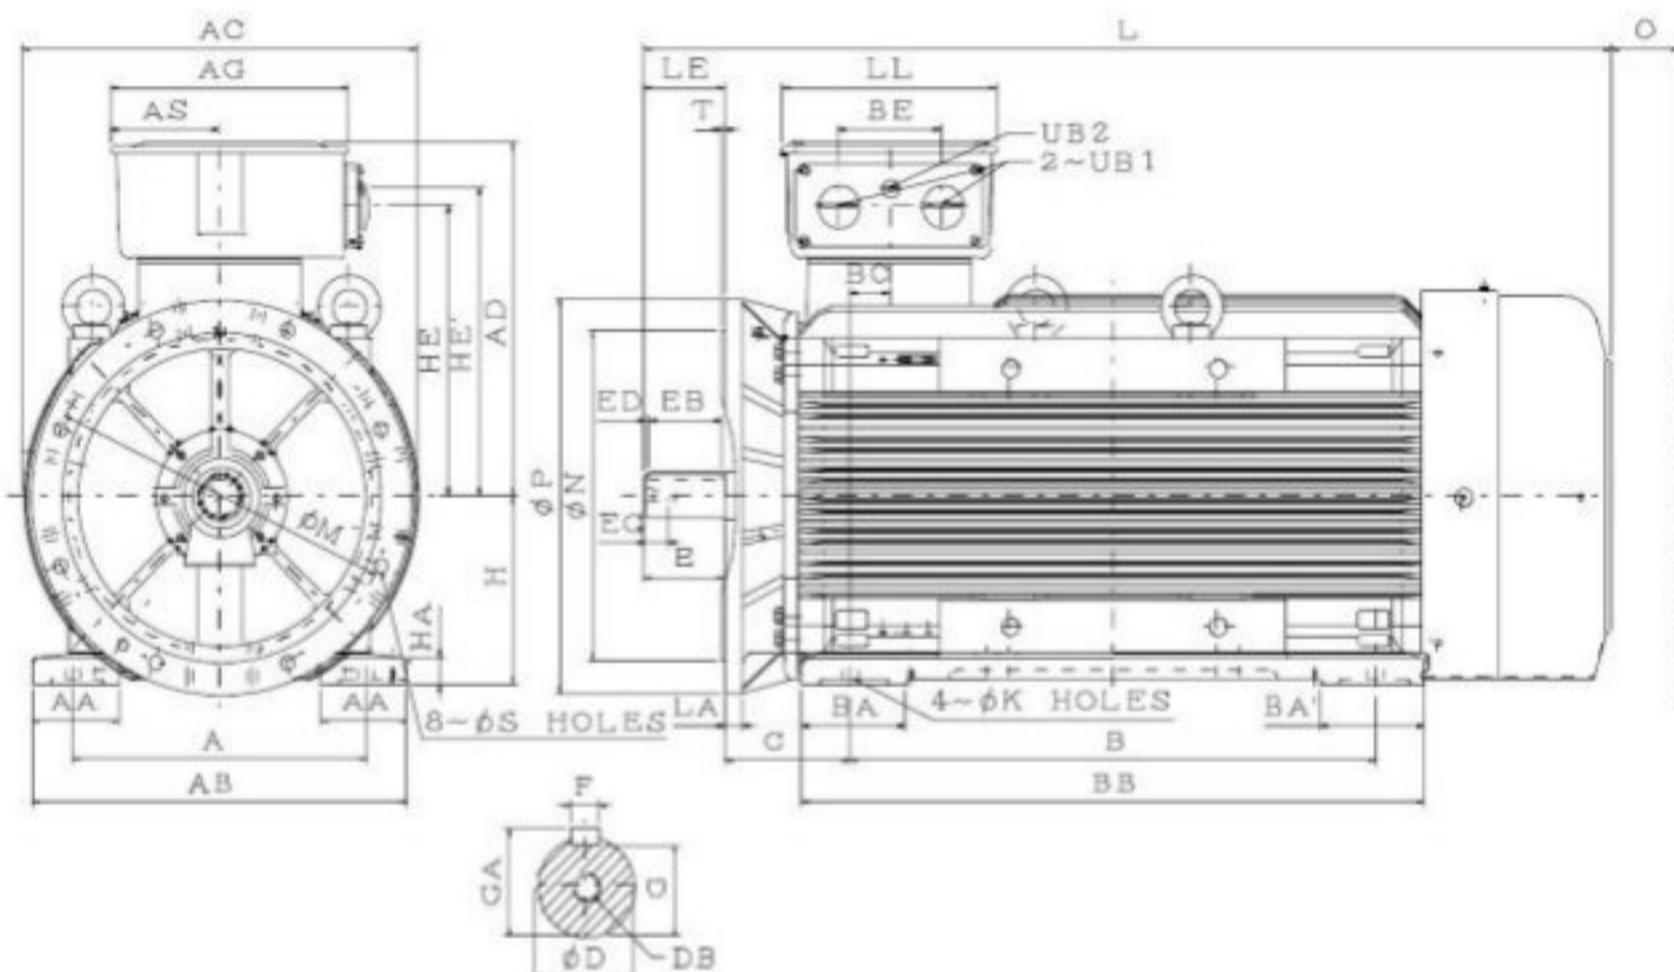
Outline drawing of cast iron design, mounting B35; frame size 315D
